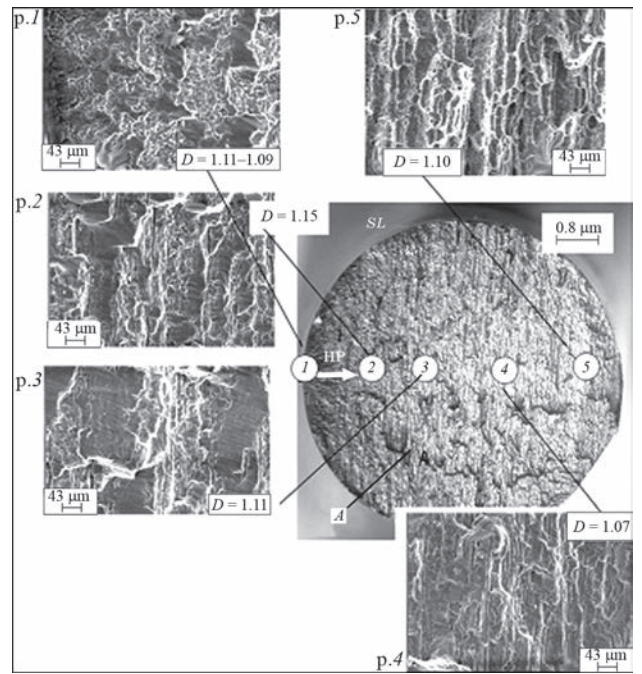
Fracture of a specimen from HAZ section after LCF testing: *a, b* — view of a fragment of broken specimen in (*L-T*) and (*L-S*) plane, respectively; *c* — fracture with typical macro- (*A*) and microrelief (pp. 1–5) of fracture; *HP* — fracture direction; *D* — fractal dimension
